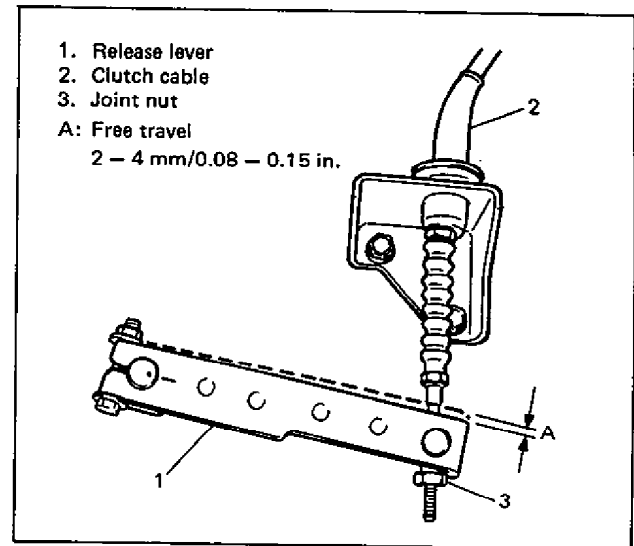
C-4 Adjusting Clutch Pedal Free Travel
